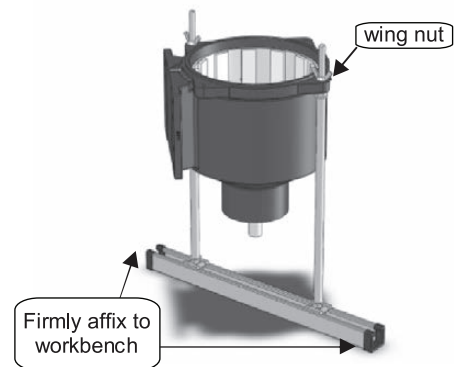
Outer Drive Assembly Mounted to Tool
